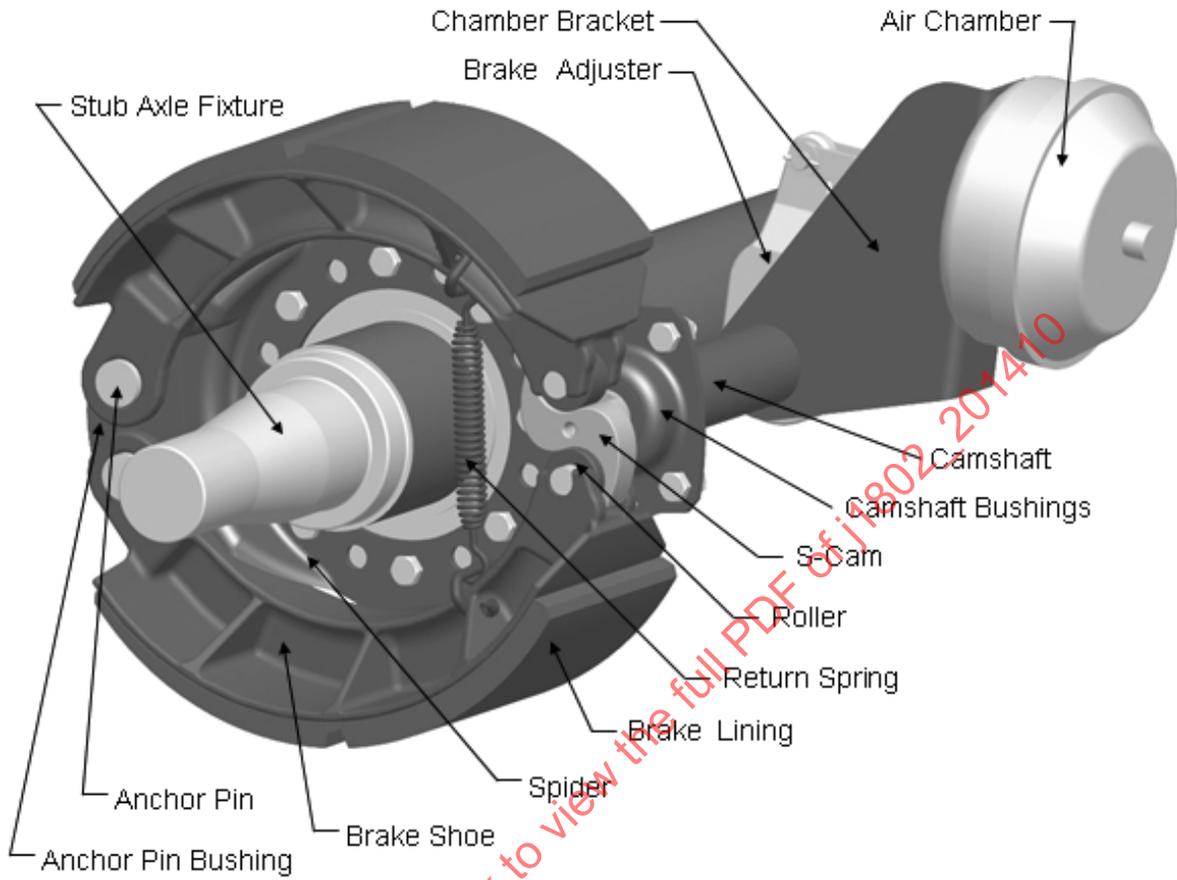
REFERENCE BRAKE ASSEMBLY
